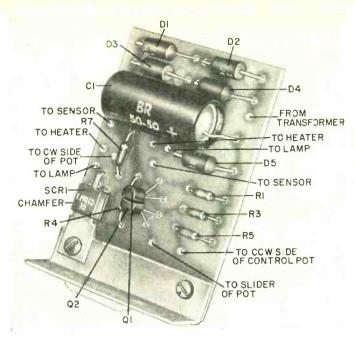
Actual-size printed circuit board etching guide is given at lower left. Component locations and orientations on circuit board are shown in photo. For proper heat sinking of SCR1, bot its tab to mounting bracket used for circuit board as shown.
